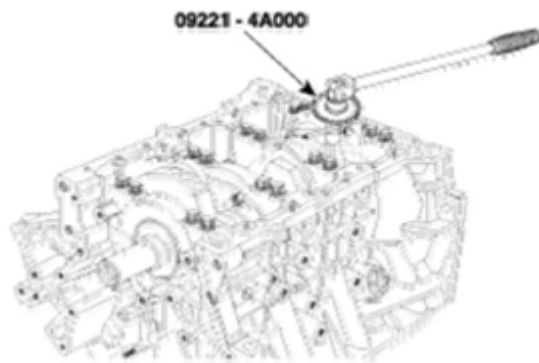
Installing Connecting Rod Bearing Cap Bolts
